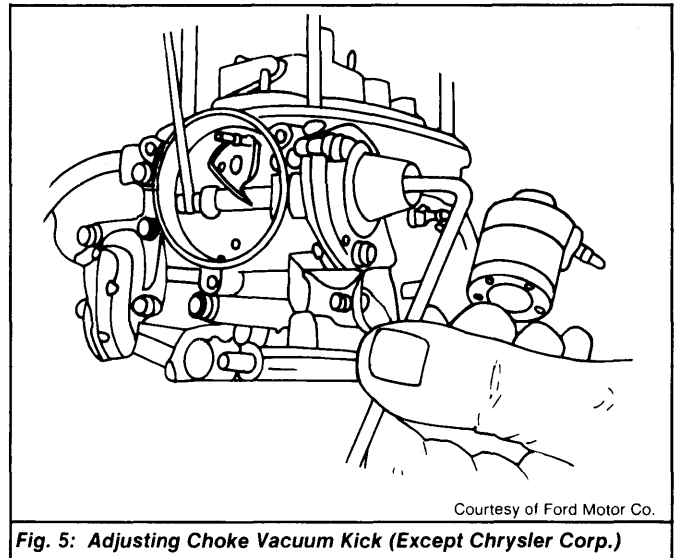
Adjusting Choke Vacuum Kick (Except Chrysler Corp.)
